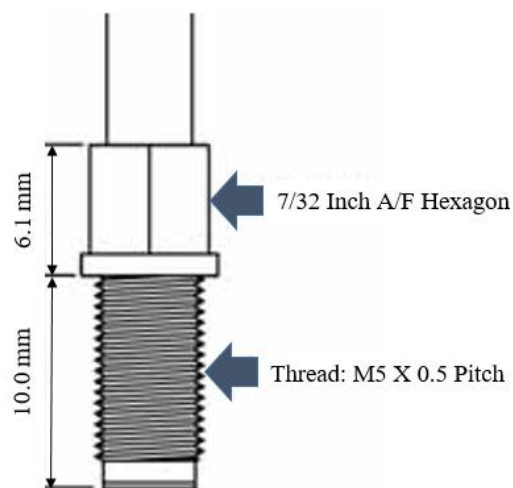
26: The mounting dimensions of the 'Optrand' Sensor head
